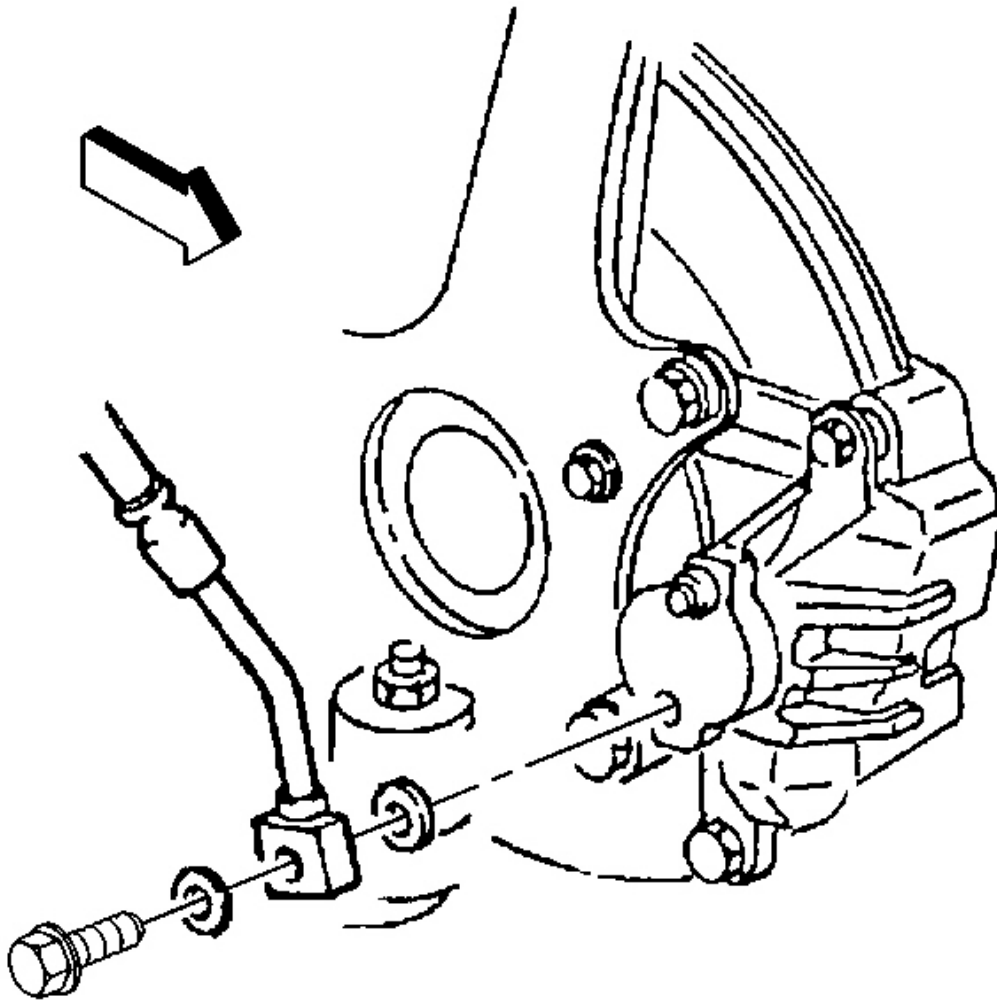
Brake Caliper Inlet Fitting Bolt To Caliper
